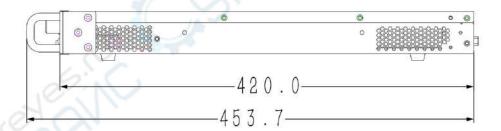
Side Dimension(mm) (Specification 12A and 8A)
